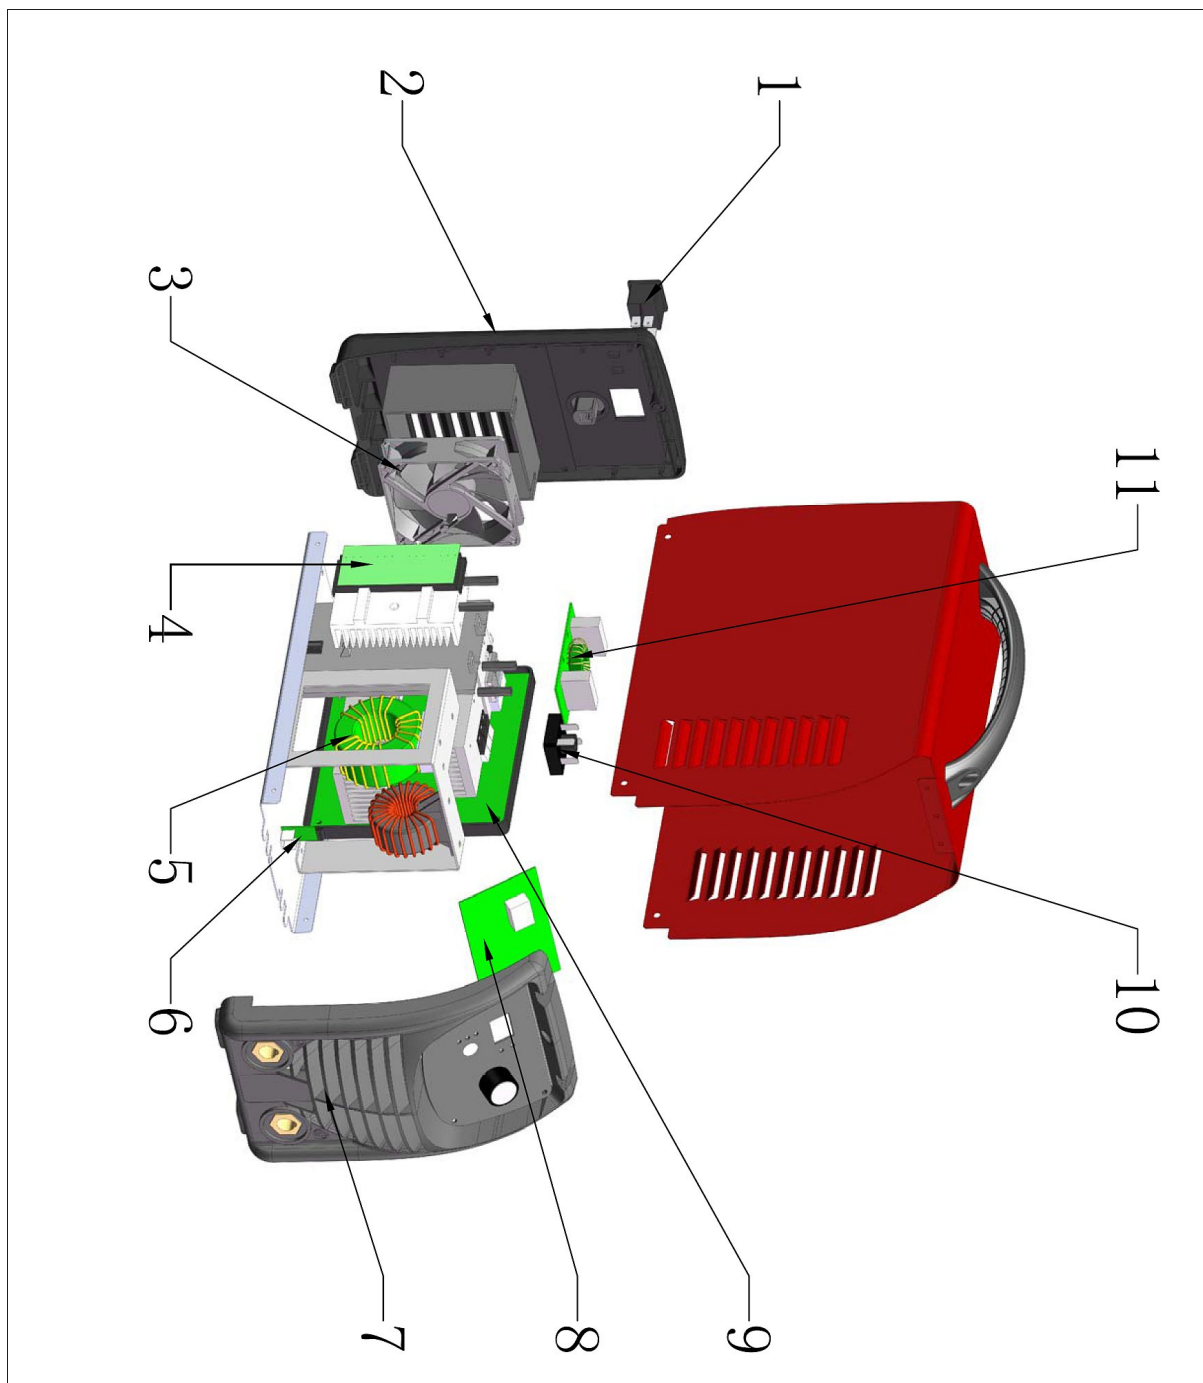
Spare parts drawing CRAFT-STICK 161P and 201 P
